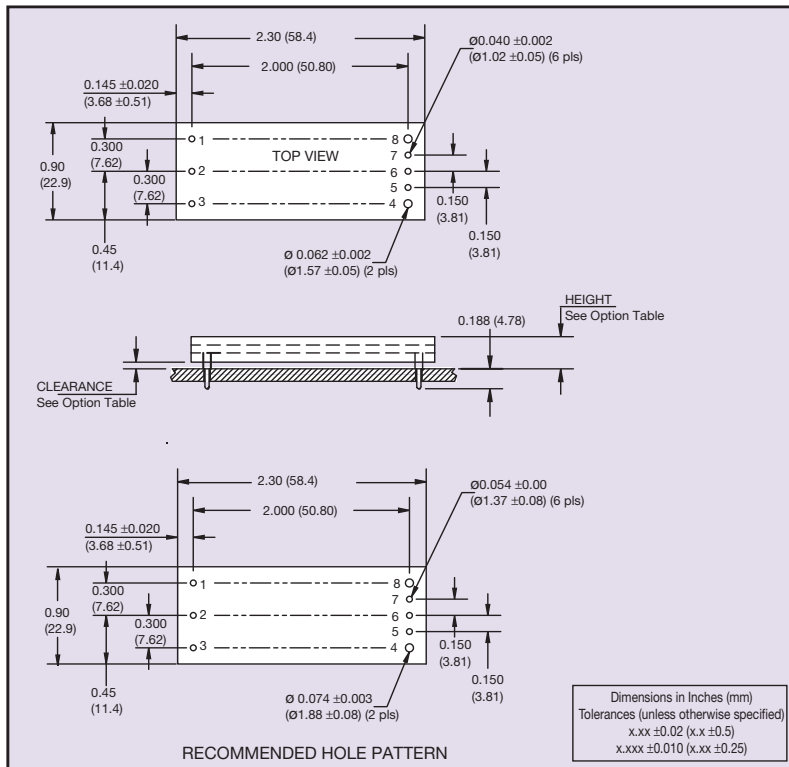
Through-hole Mechanical Drawing, Dimension Options and Pinout Table
